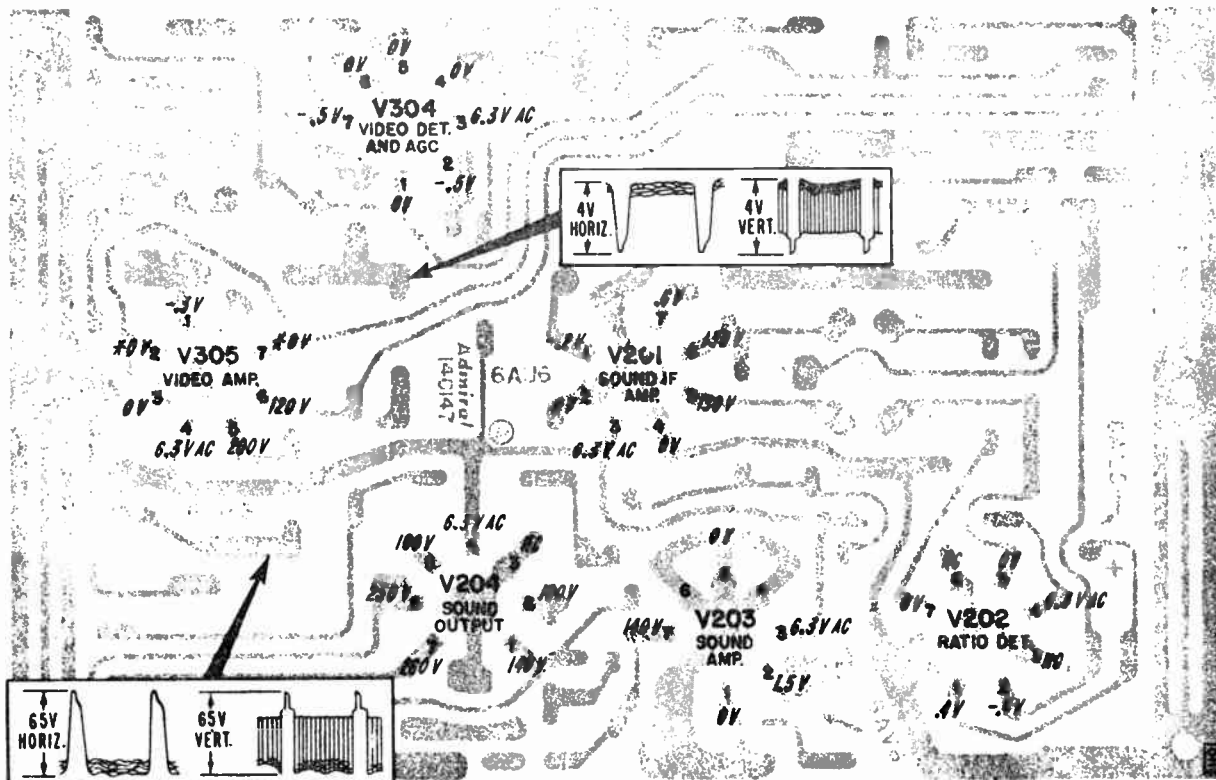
Top View of Printed Circuit Assembly (Used in Chassis Stamped Run 8 or Lower) Showing Voltages Measured Under Conditions Given on Schematic.
